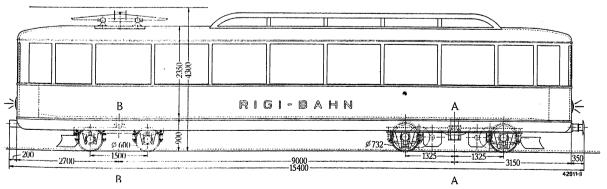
Drawing for one of the new geared motor coaches of the Rigi Railway.
